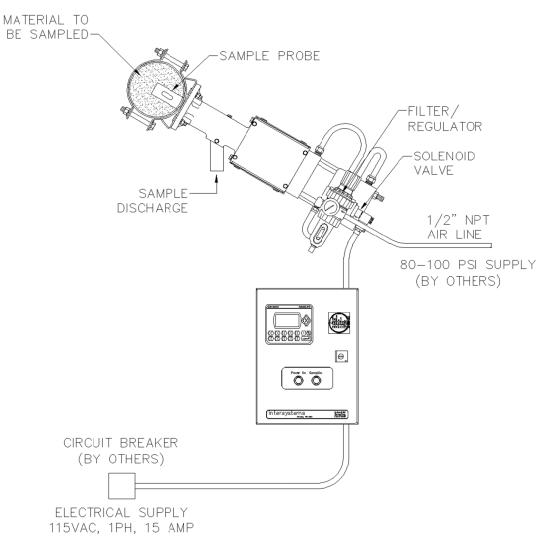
, TYPICAL INSTALLATION, MODEL PDP SAMPLING SYSTEM
